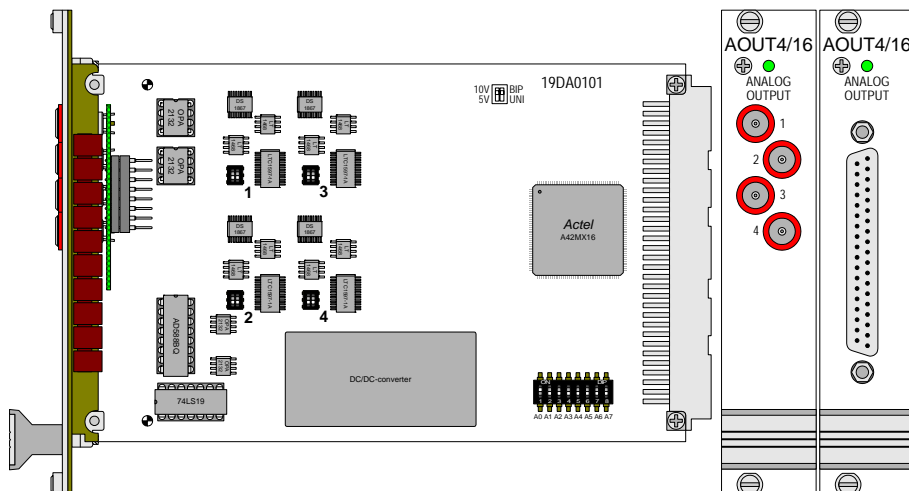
Pro-AOut-4/16 REVb: Board and front panel
